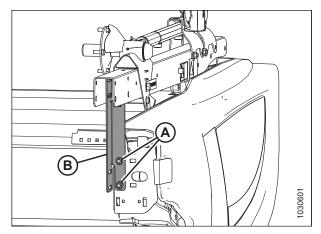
Outboard Reel Arm Supports – D1X Header Shown
